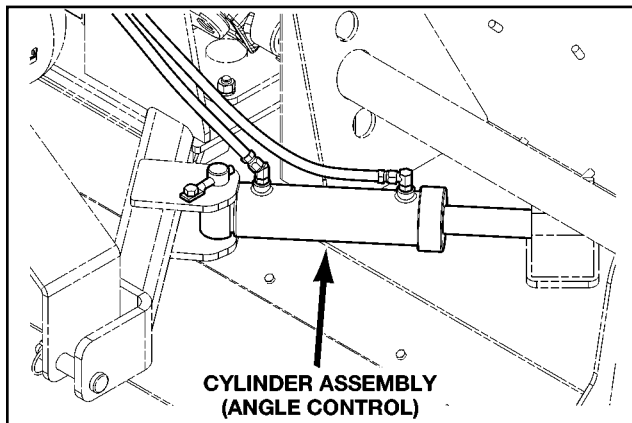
Hydraulic Angle - Cylinder Assembly
